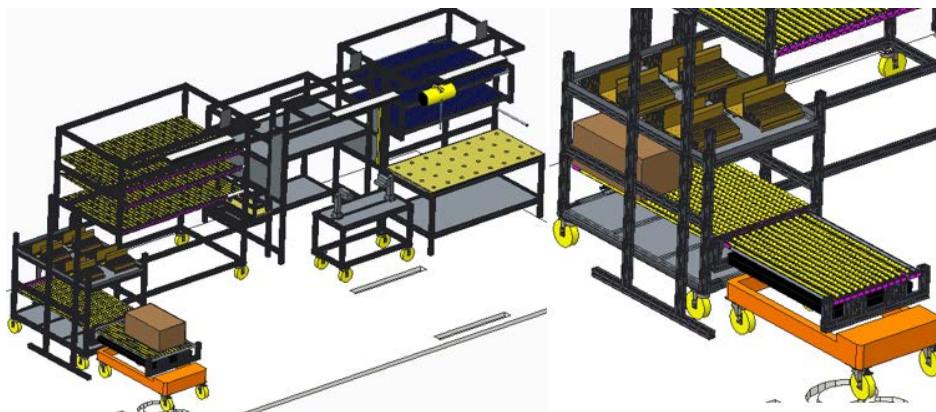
Transferring a packaged radiator form the trolley to the finished product car
